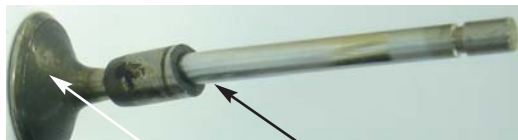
Stem bending due to valve interference in the piston top
